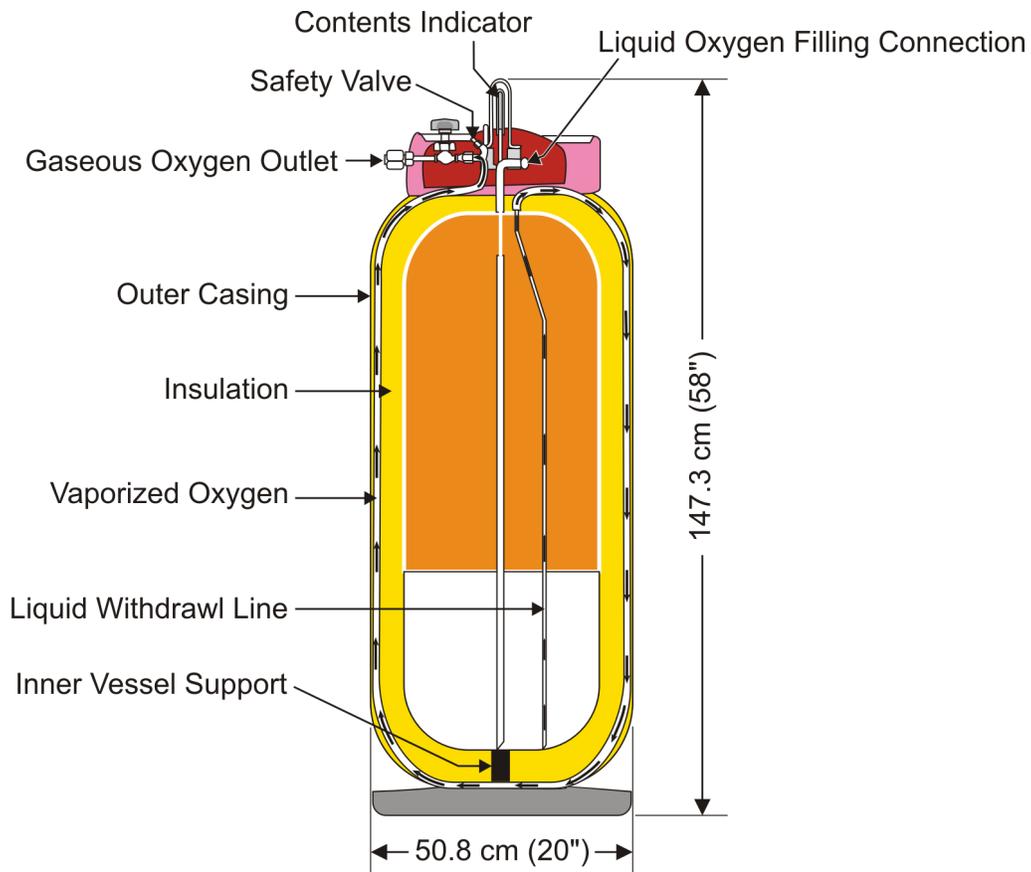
Liquid oxygen vessel. (Courtesy ESAB Welding and Cutting Products)
